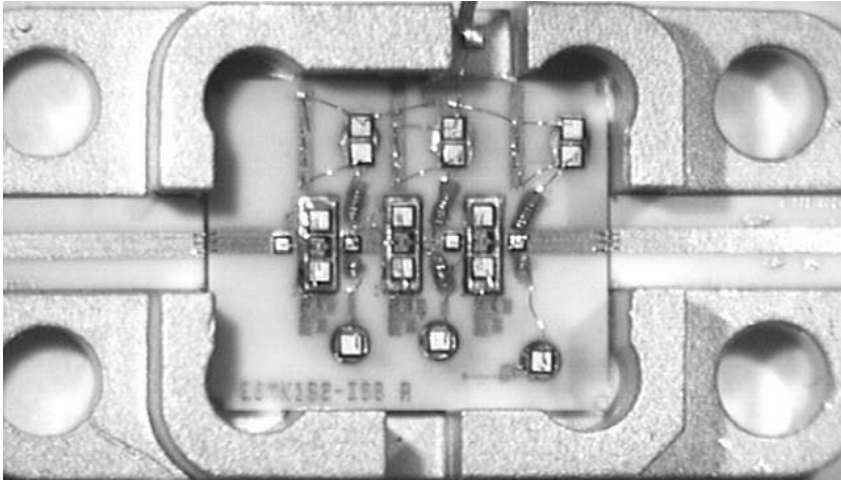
Photograph of the fabricated three-stage high gain CRTSSDA module.
